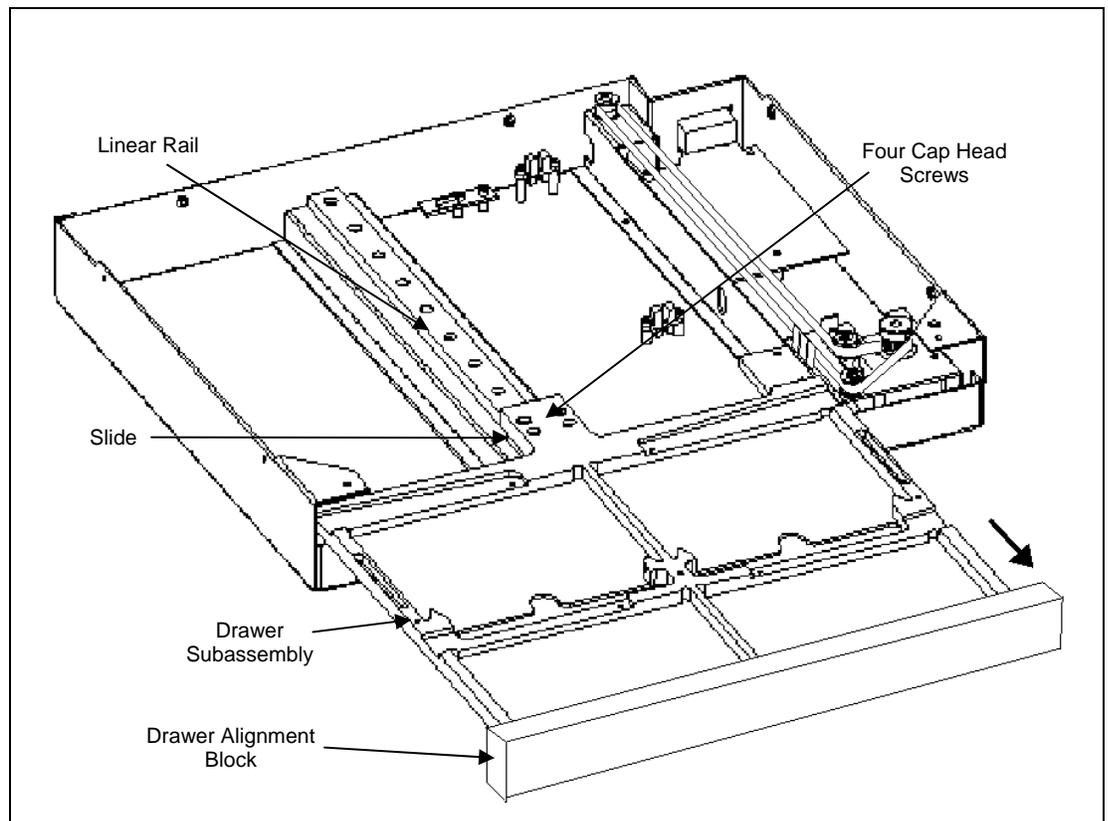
Ambient Drawer and Alignment Jig (Bezel not Shown)
